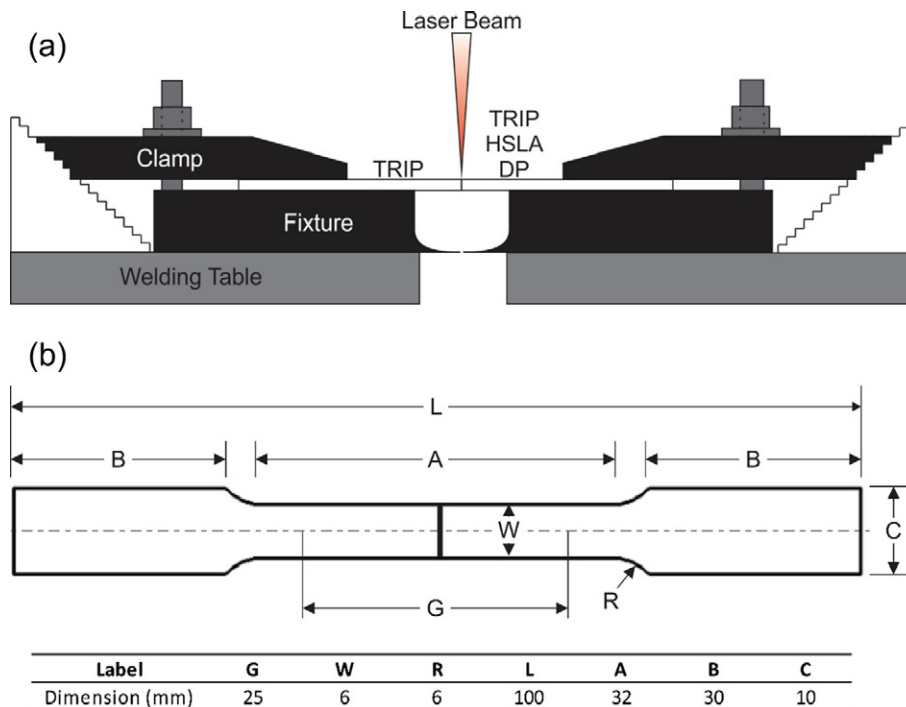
Illustrative schematics of the (a) welding fixture and (b) ASTM E8 sub size tensile test specimen geometry.
